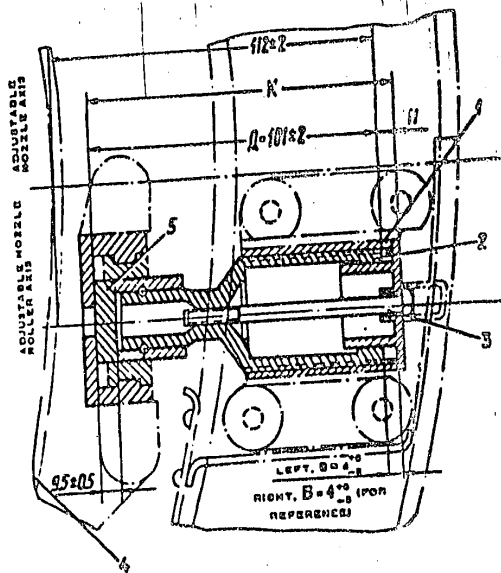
CHECKING ROLLER SETTING WITH FEELER GAUGE
